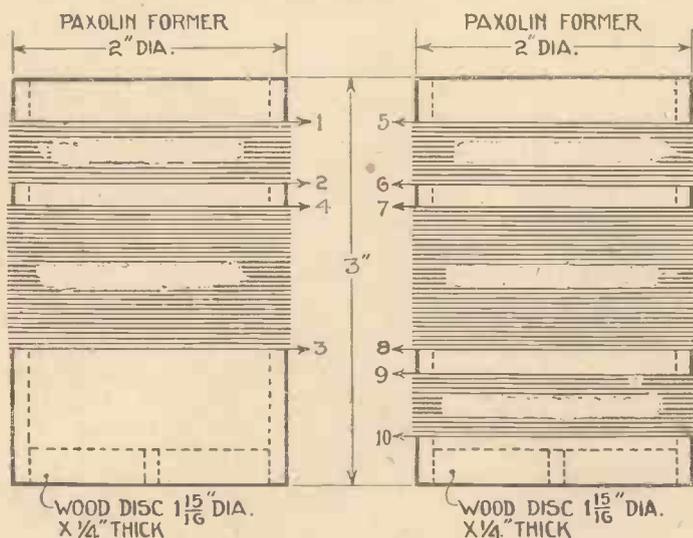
Details of Aerial Coil and H.F. Transformer.
